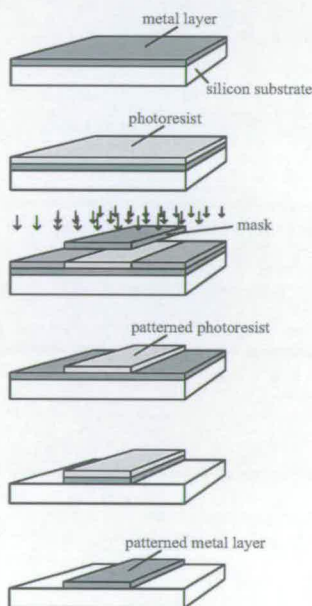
Conventional technique commonly used to deposit and pattern a metal layer.
